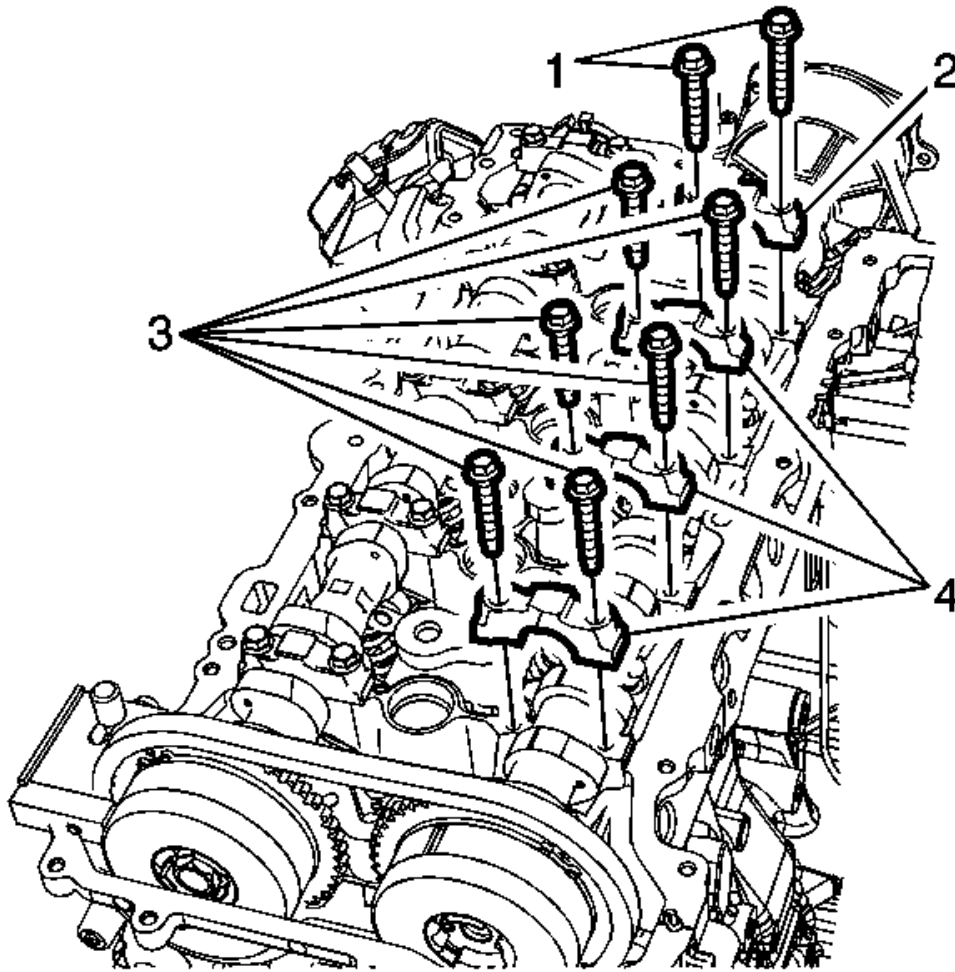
Exhaust Camshaft Bearing Rear Cap Bolts And Cap
